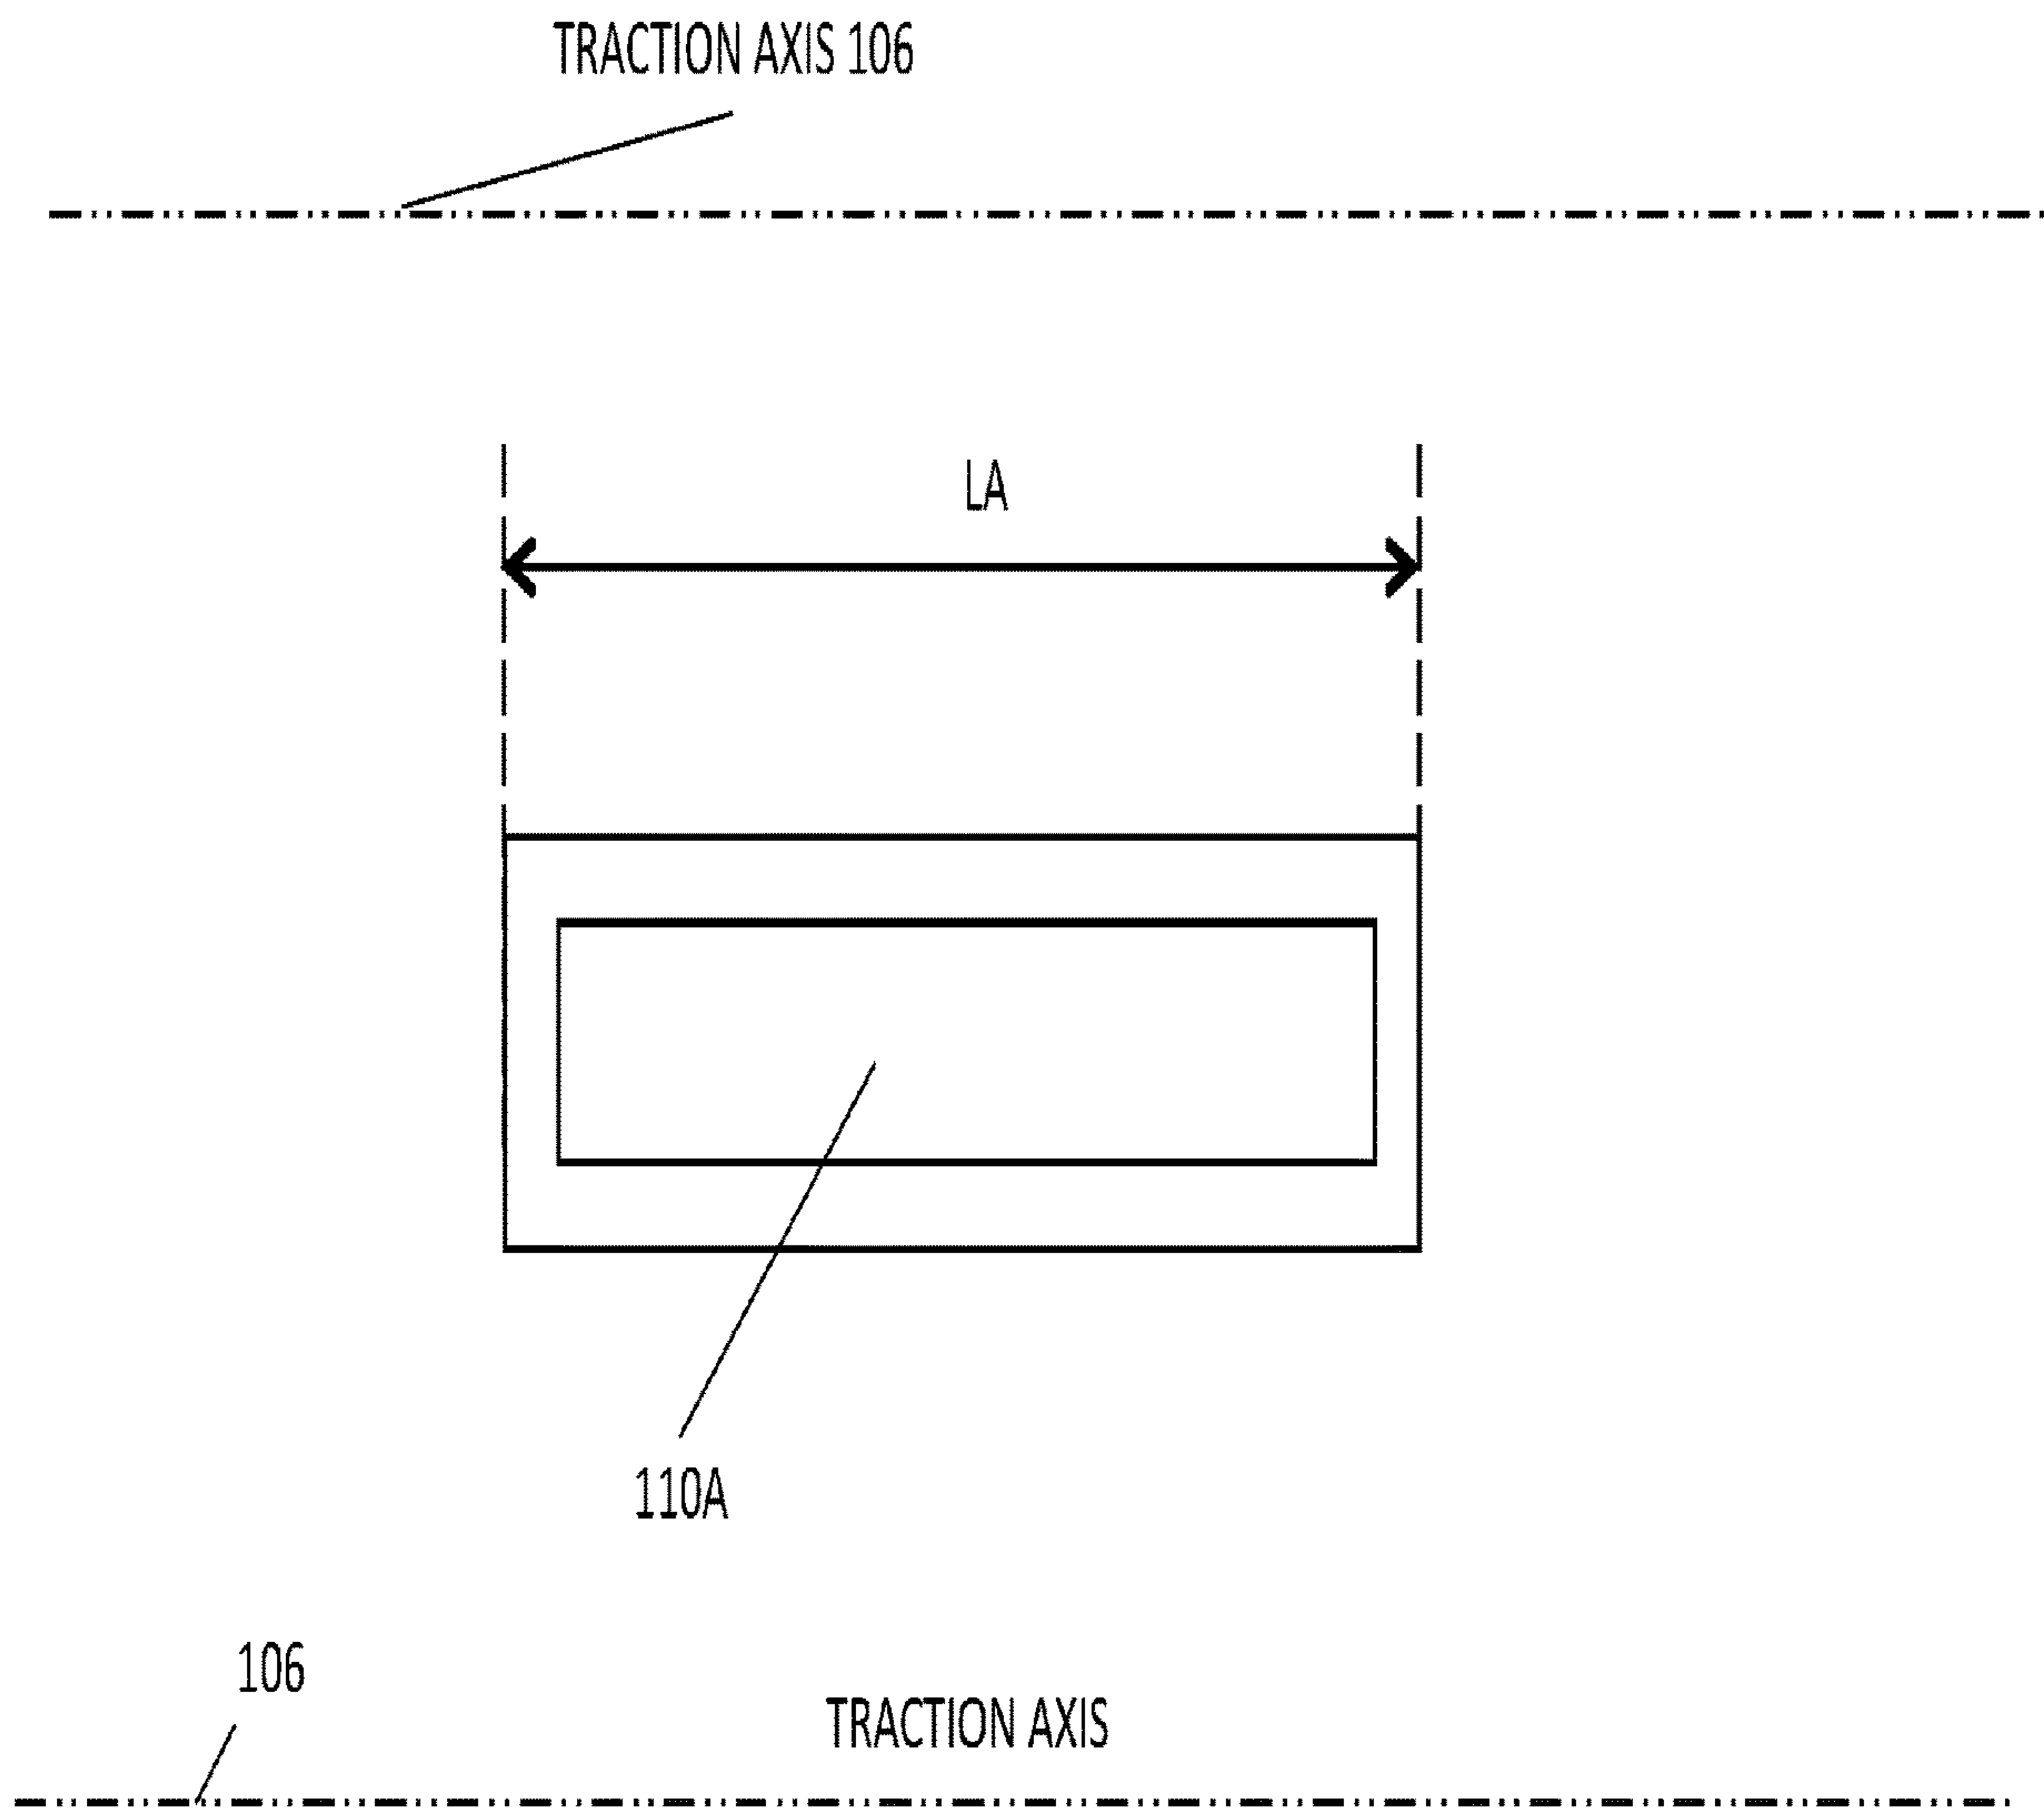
C - DETAIL, SIDE VIEW, EXTENDED
